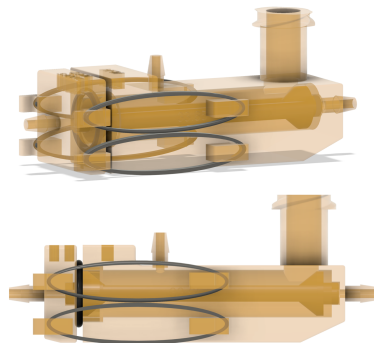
Complete assembly with elastics or O-rings (six-and-a-half mm diameter).
